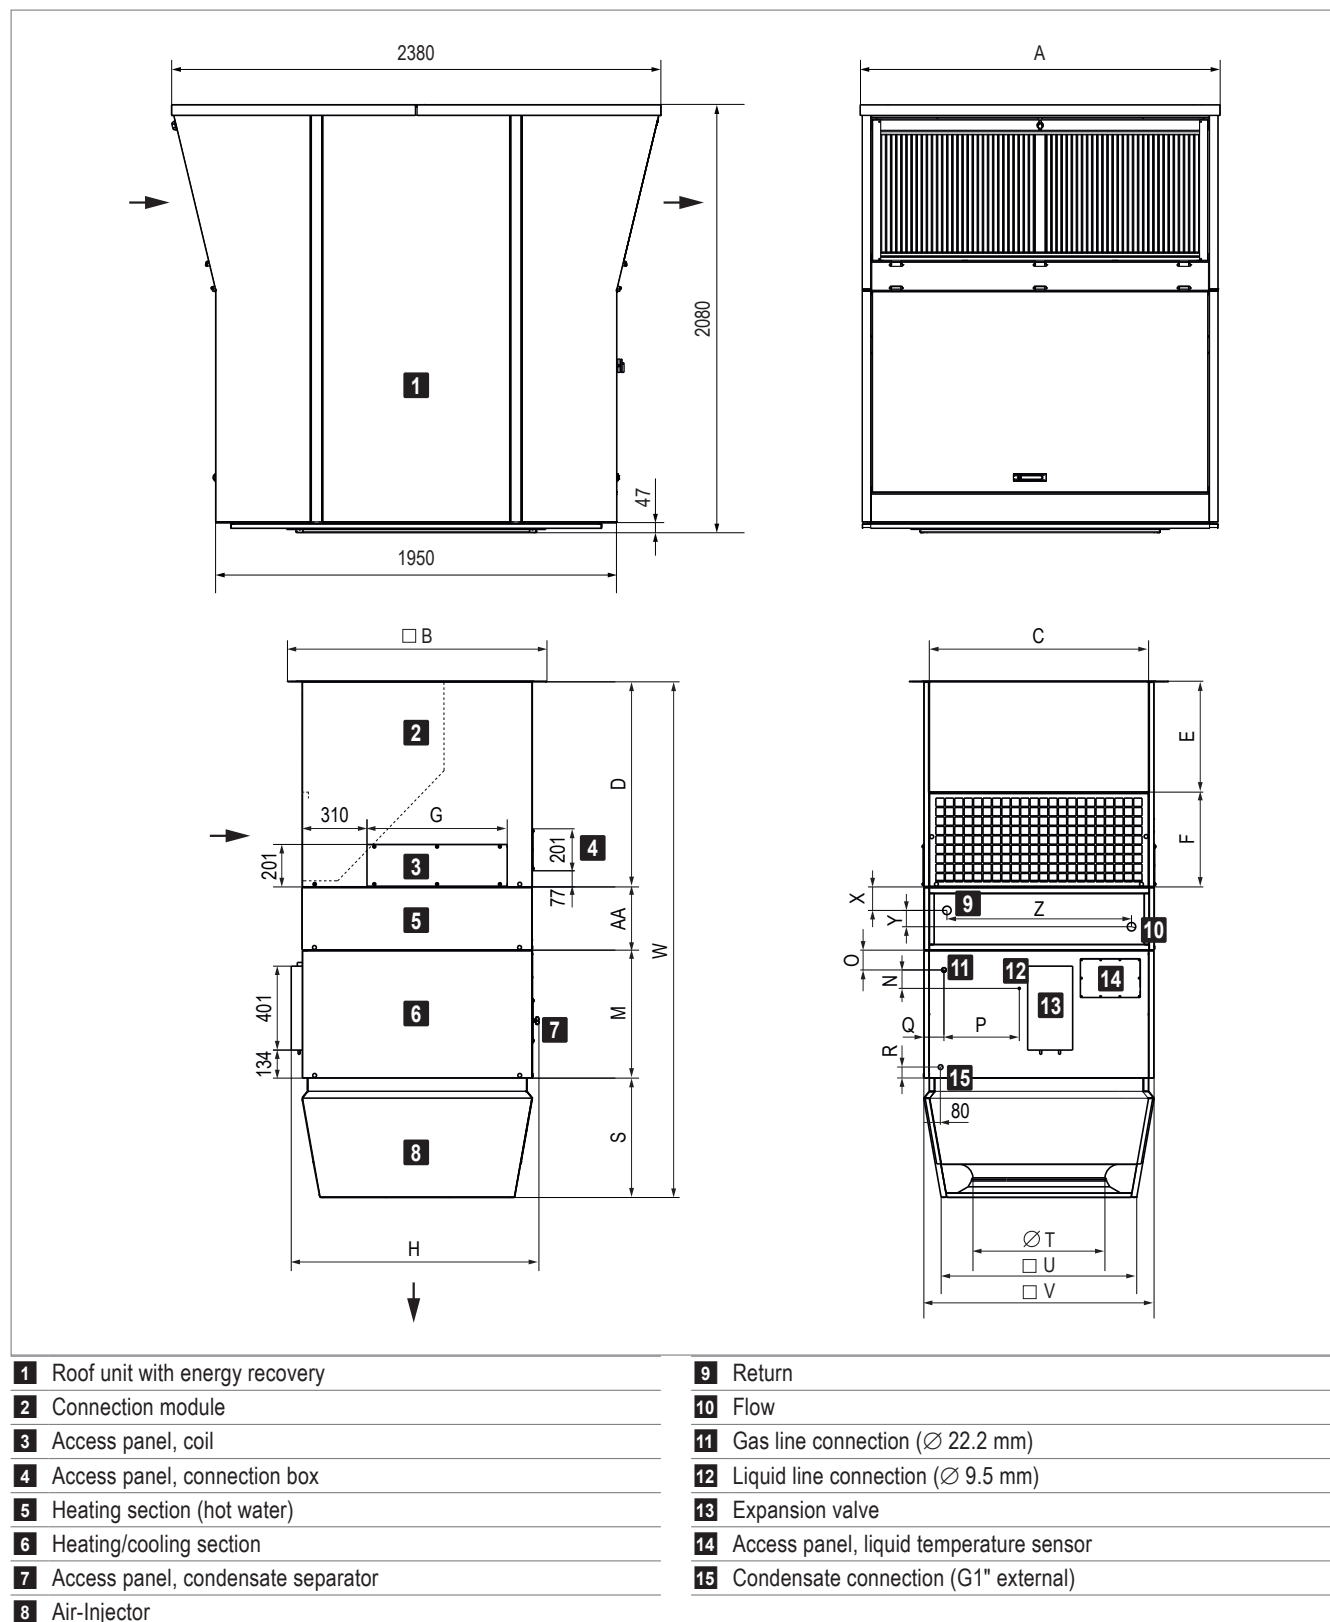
RoofVent® RP-6AK, RP-9AK dimensional drawing (dimensions in mm)
